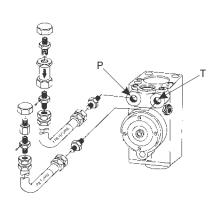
and 745. Connecting Hydraulic Lines
